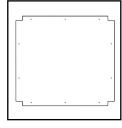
2 CORE FACE PLATE PANEL
